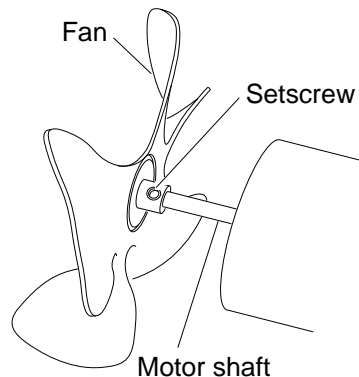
Fan, Motor Shaft, and Setscrew Location
